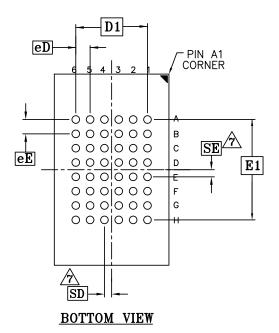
48-ball FBGA (6 × 10 × 1.2 mm) Package Outline, 51-85128
